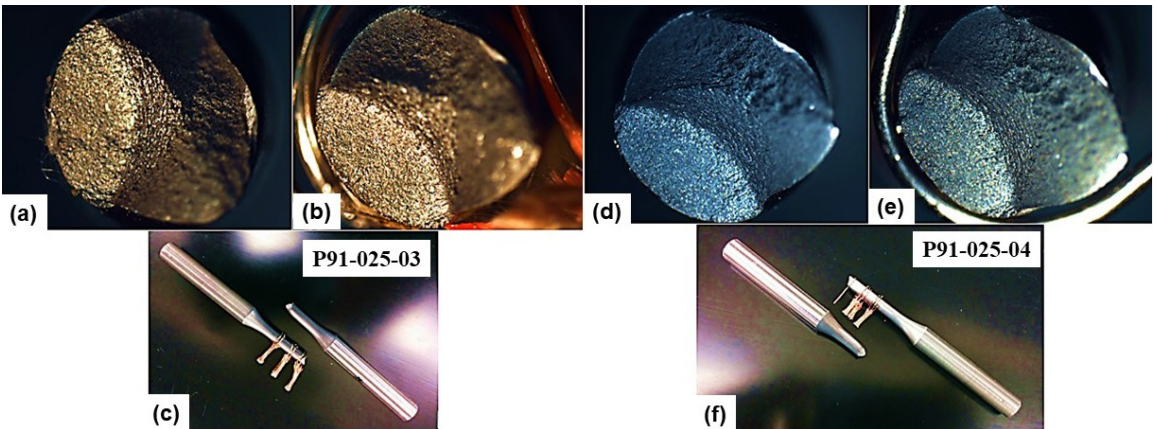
Broken specimen pictures. a) P91-025-03 fractured section taken by microscope; b) other half of the P91-025-03 fractured section; c) point of fracture; d) P91-025-04 fractured section taken by microscope; e) other half of the P91-025-04 fractured section; f) point of fracture.
